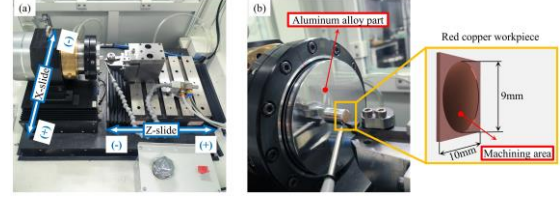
Photographs of the experimental setup. (a) overall view; (b) close-up view
